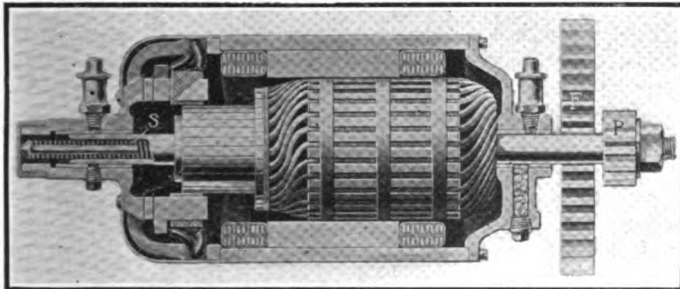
Section through Bosch-Rushmore starting motor, showing displaced armature, which automatically draws the starting pinion into mesh on applying the current
